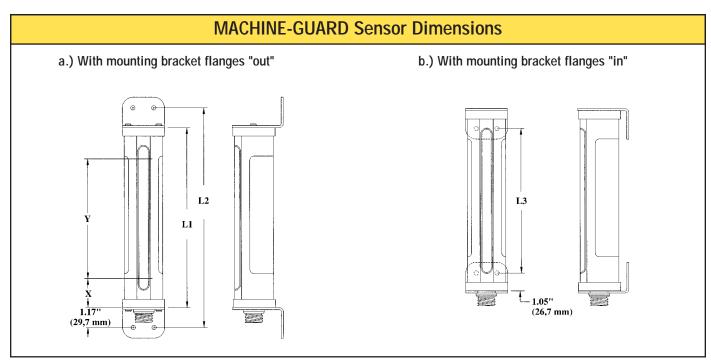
Emitter and receiver mounting dimensions and location of defined area for MACHINE-GUARD sensors.
